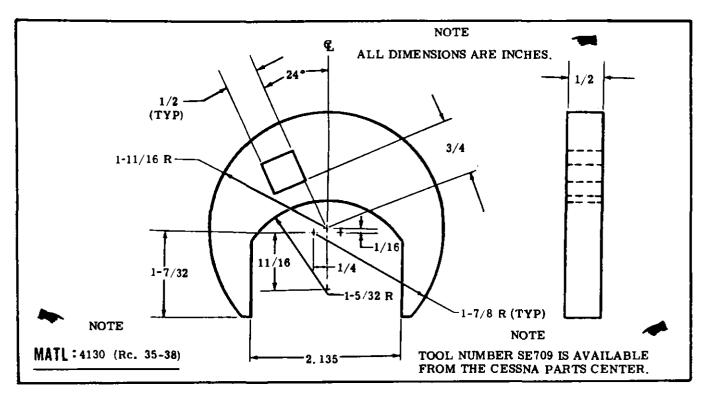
Oil Filter Adapter Wrench Fabrication
